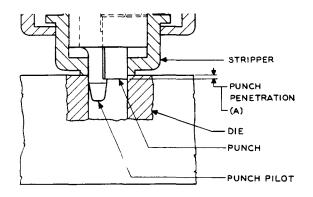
Punch Penetration — Hole-Enlarging Punch (660A tool shown)
